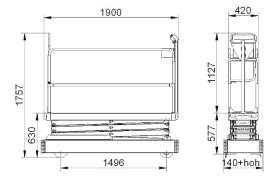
Minimum dimensions of the 3-scissor model up to 3.5m
